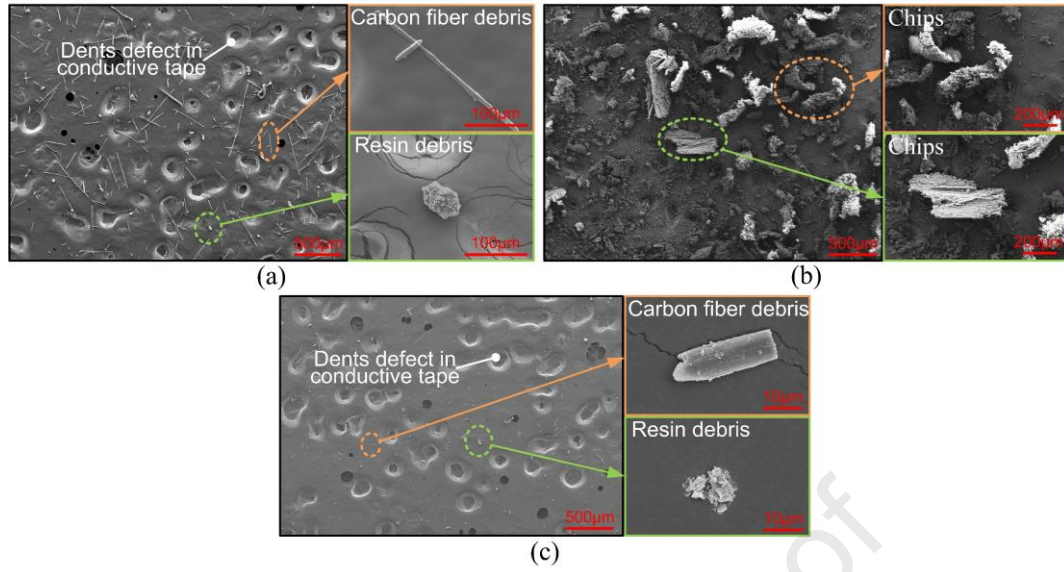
Chips/debris of the CFRP removed by different machining methods. (a) Debris removed by EDM. (b) Chips removed by mechanical drilling. (c) Debris removed by electrical discharge-mechanical hybrid drilling.
